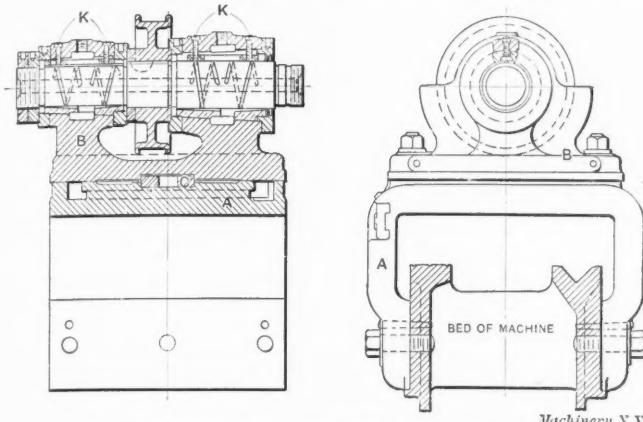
Work Spindle Head and Method of Supporting it on Bed.
